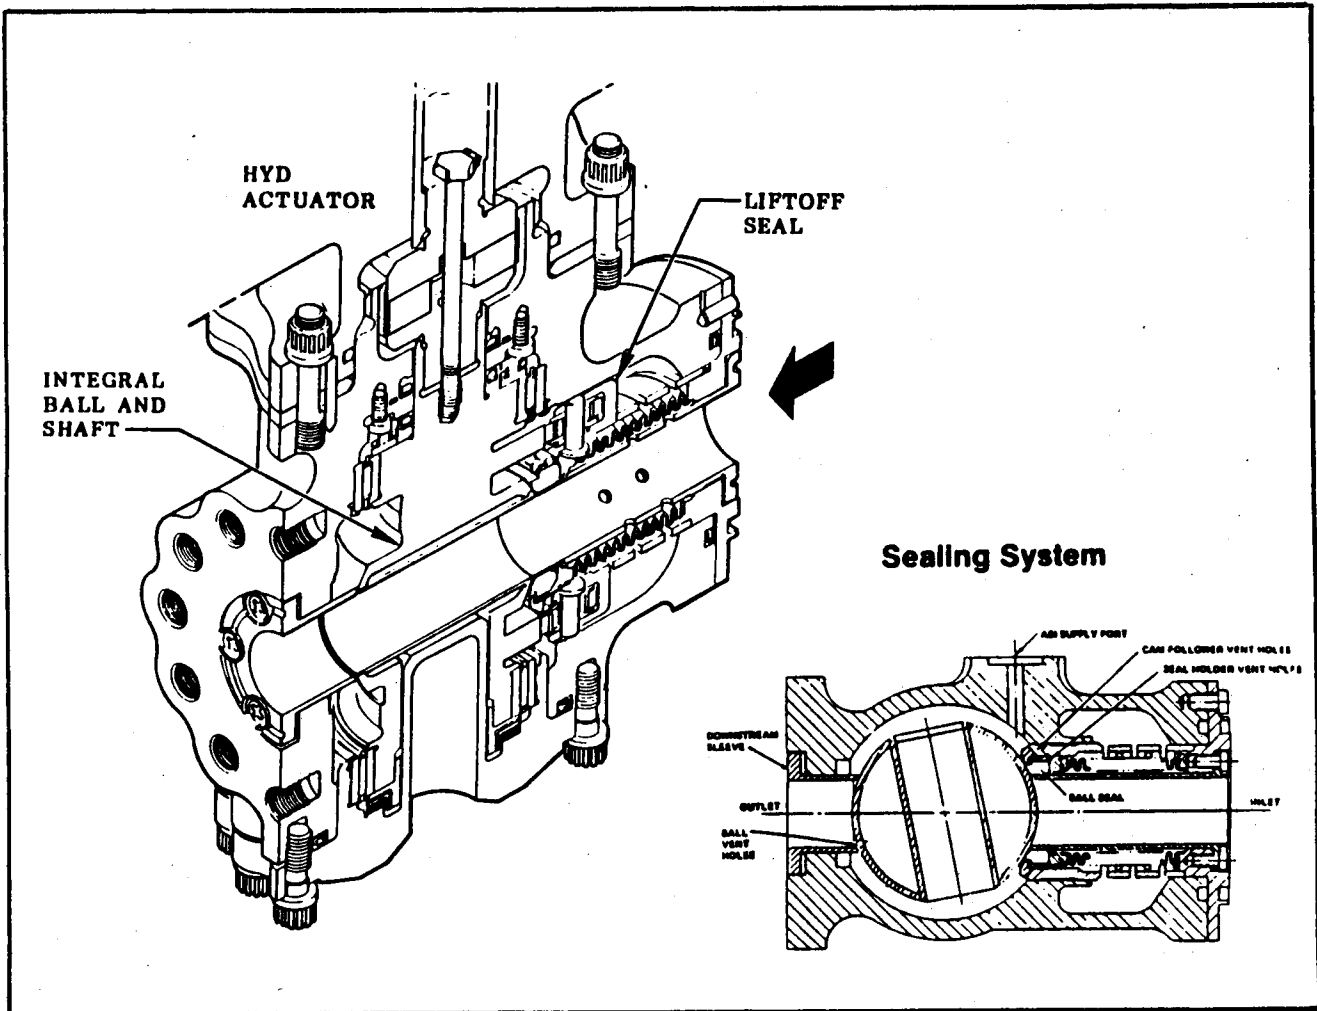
SSME Fuel Preburner Oxidizer Valve Assembly and Sealing System
